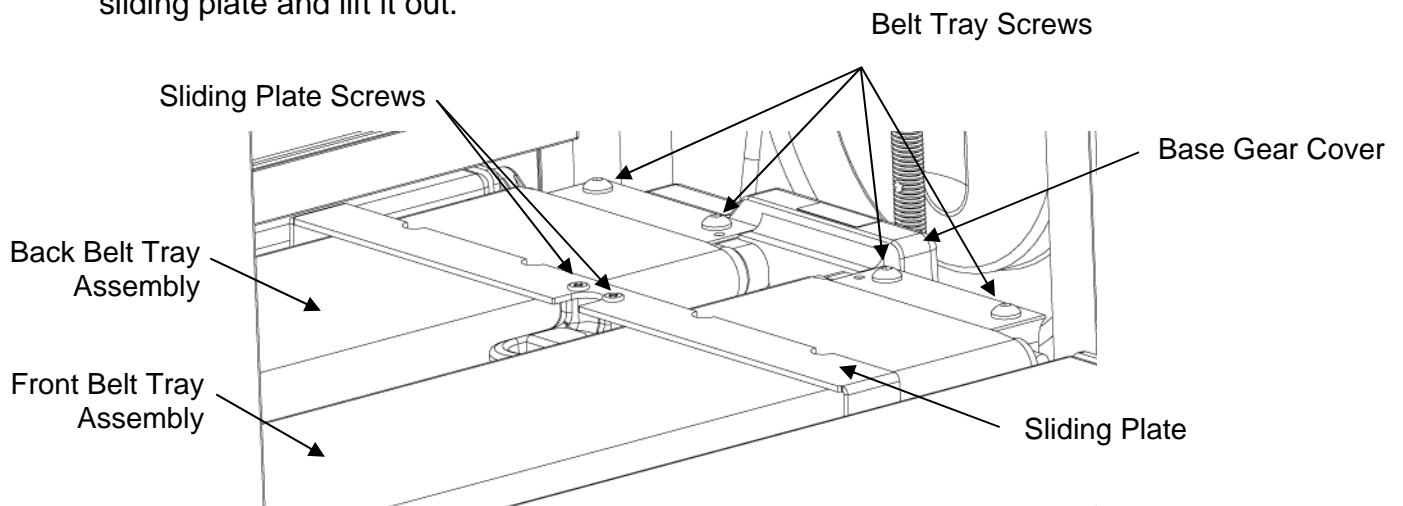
VIEW OF THE SLIDING PLATE AND BELT TRAY SCREWS (RIGHT SIDE)
